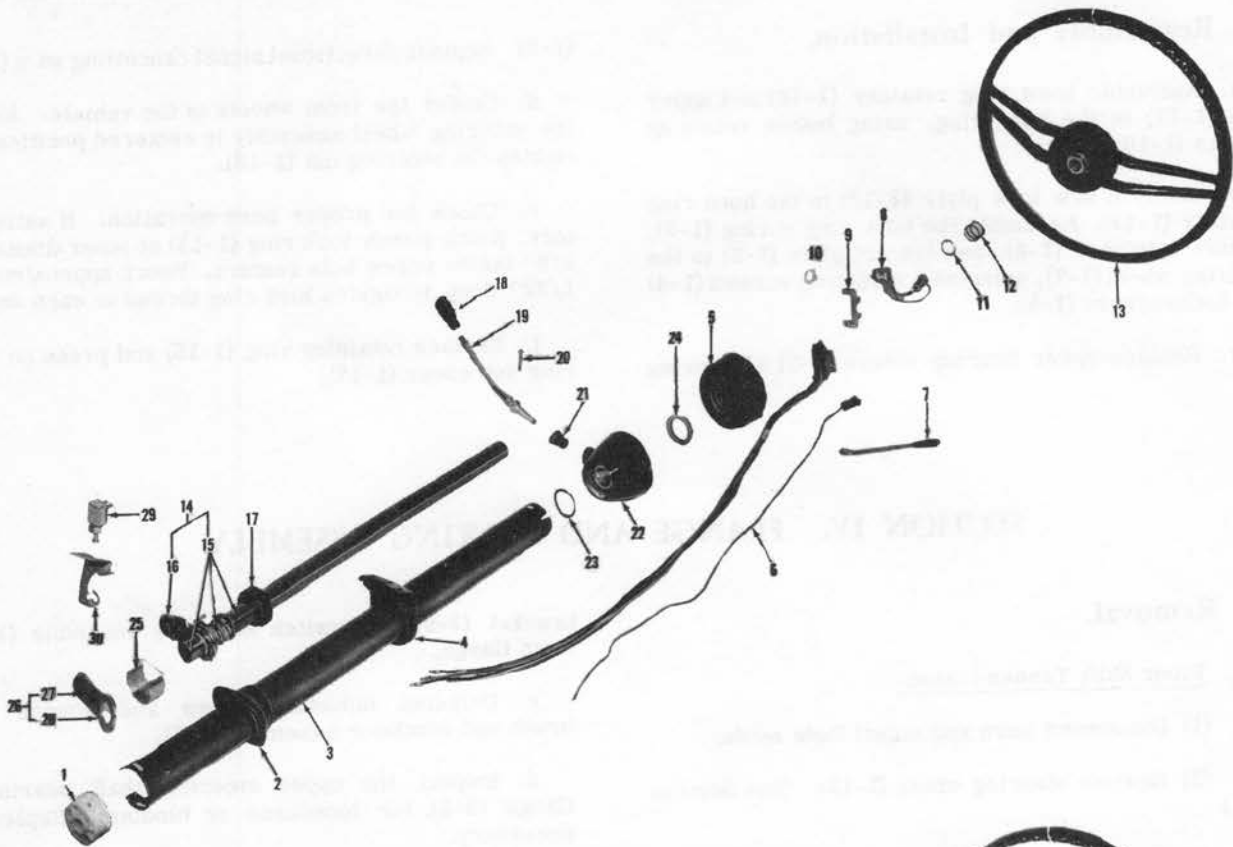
Shift Selector and Steering Wheel - Manual and Overdrive Transmission
